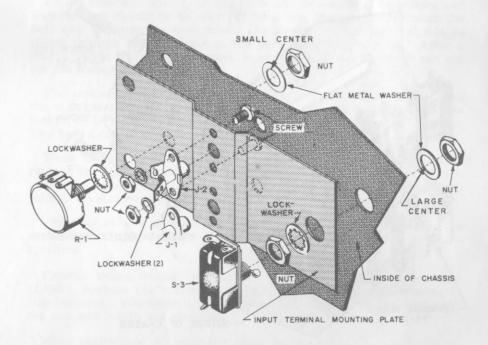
INPUT TERMINAL MOUNTING DETAIL
